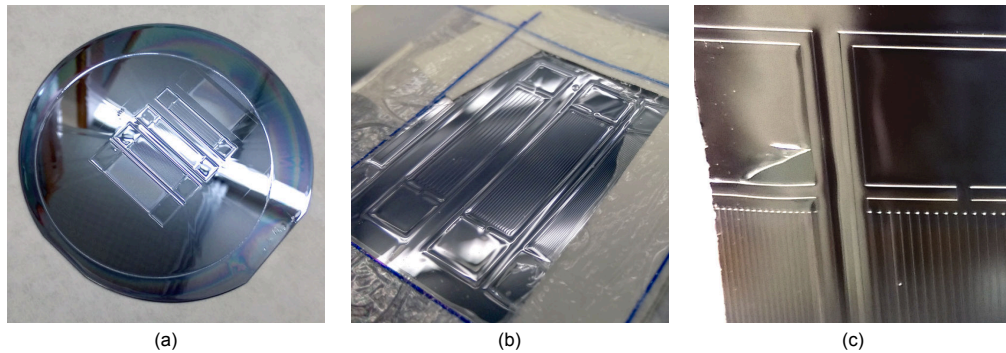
Thin film of Sylgard 184 on SU-8 master mould after spin coating. (a) Full wafer showing streaks due to large grooves on master mould. (b) Magnified view showing uneven surface of silicone membrane. (c) Silicone tearing at sharp edges during removal.
